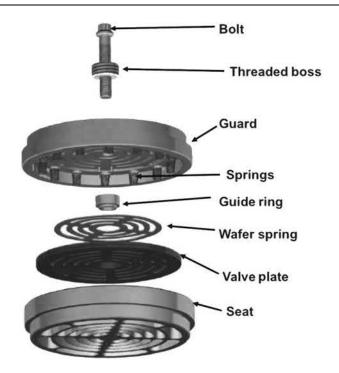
Components of an Ariel plate valve photograph of an Ariel plate valve. Courtesy of Ariel Corporation.
